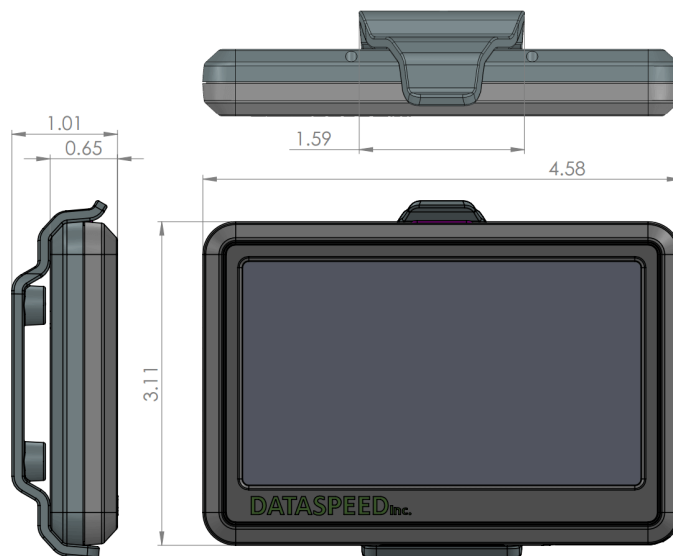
iPDS Switch Panel Mechanical Drawing for Ford Fusion
